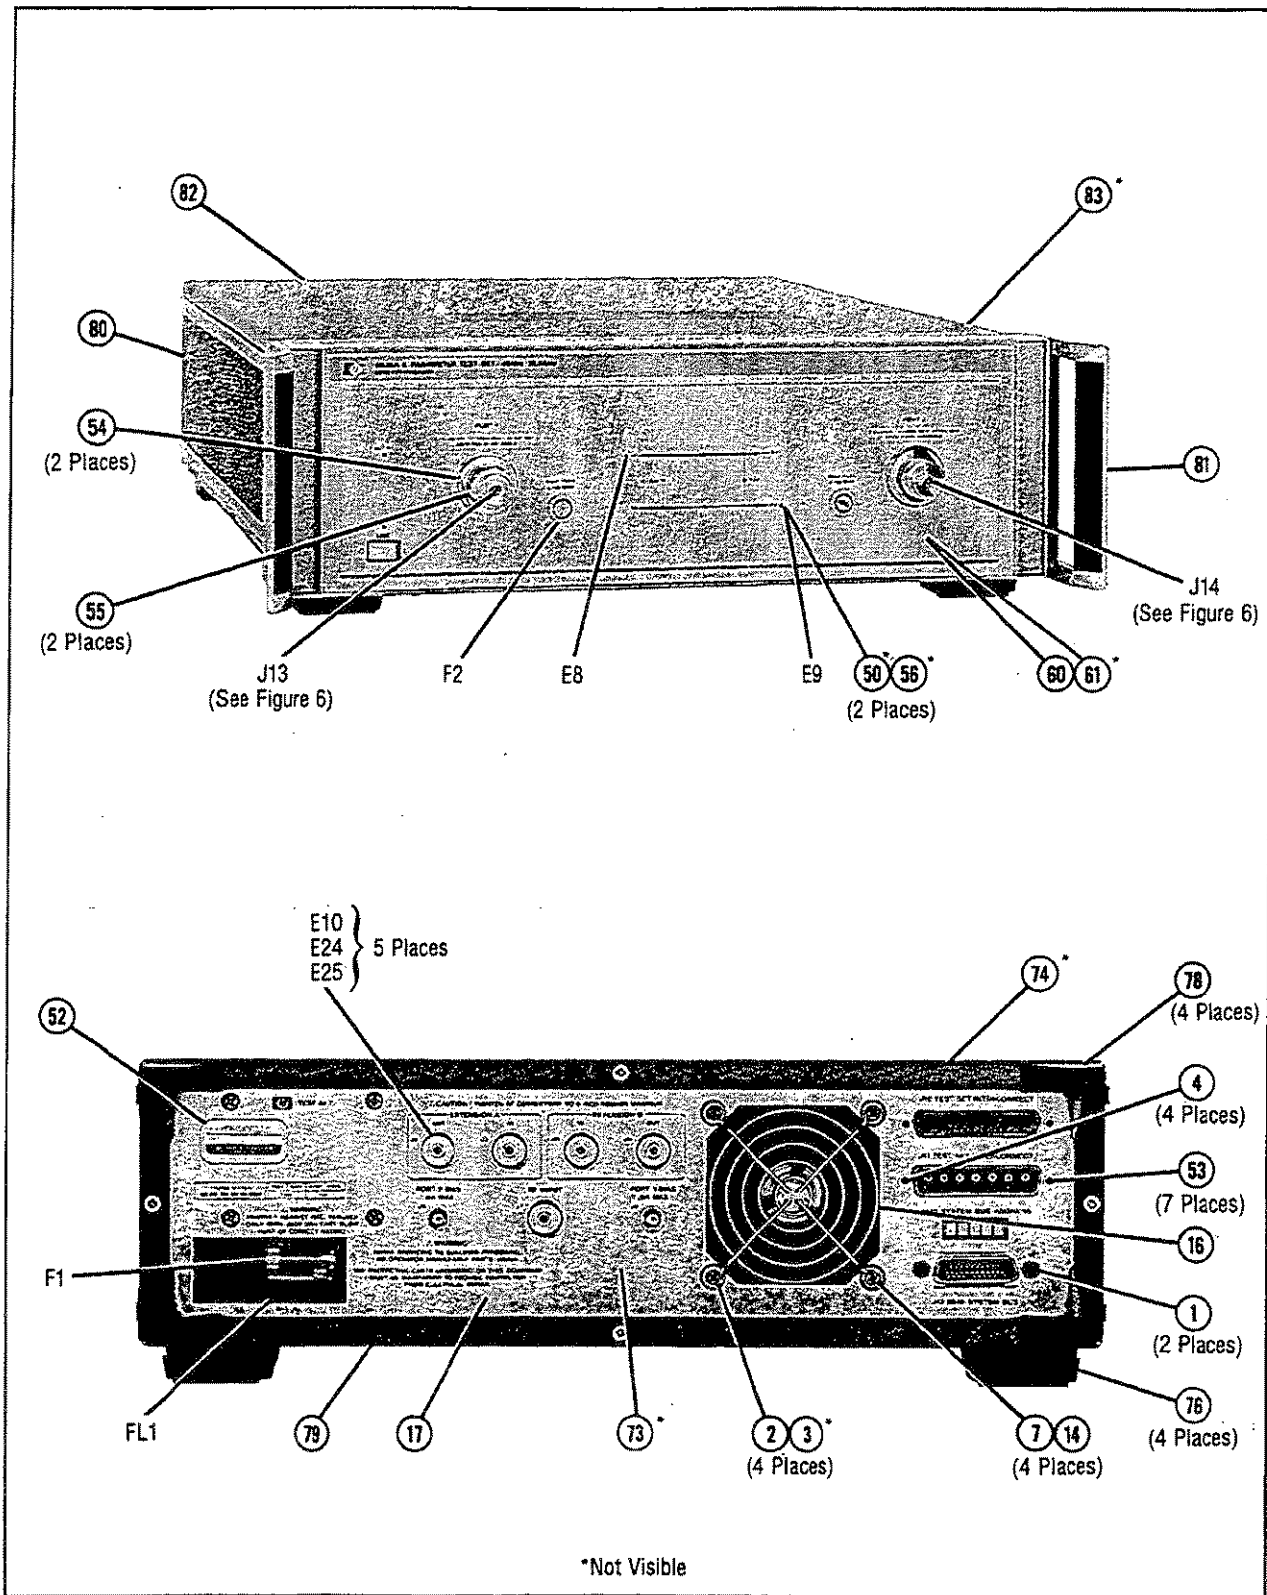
HP 8515A Miscellaneous Mechanical, Chassis, and Electrical Parts (1 of 5)
